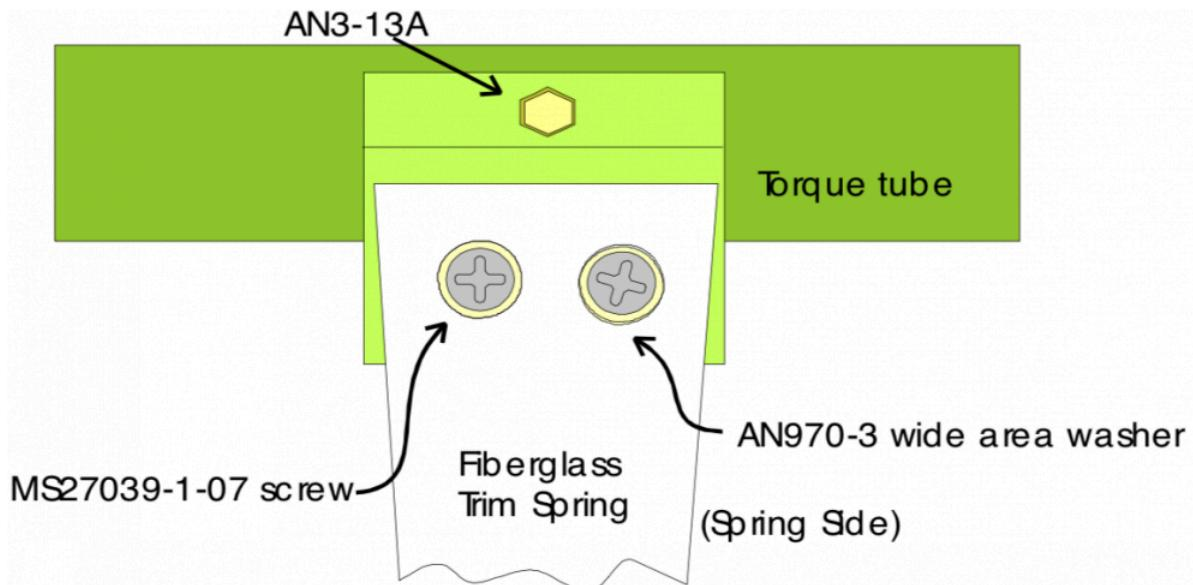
Elevator Trim Spring to Torque Tube Attachment
